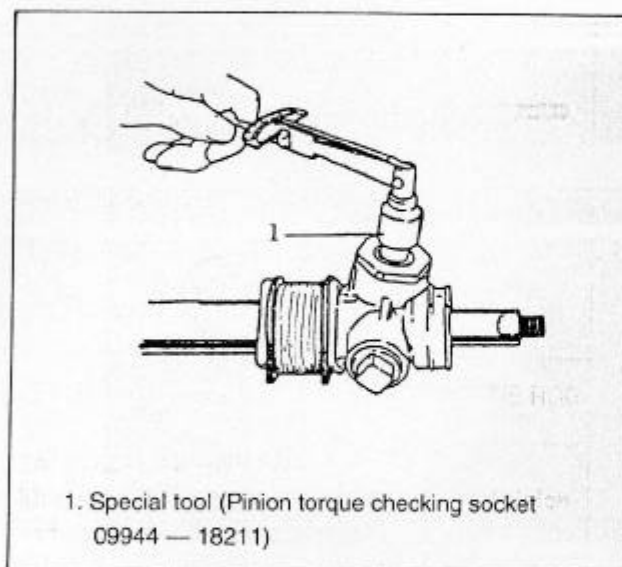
B — 14 ADJUSTING RACK ROTATING TORQUE
